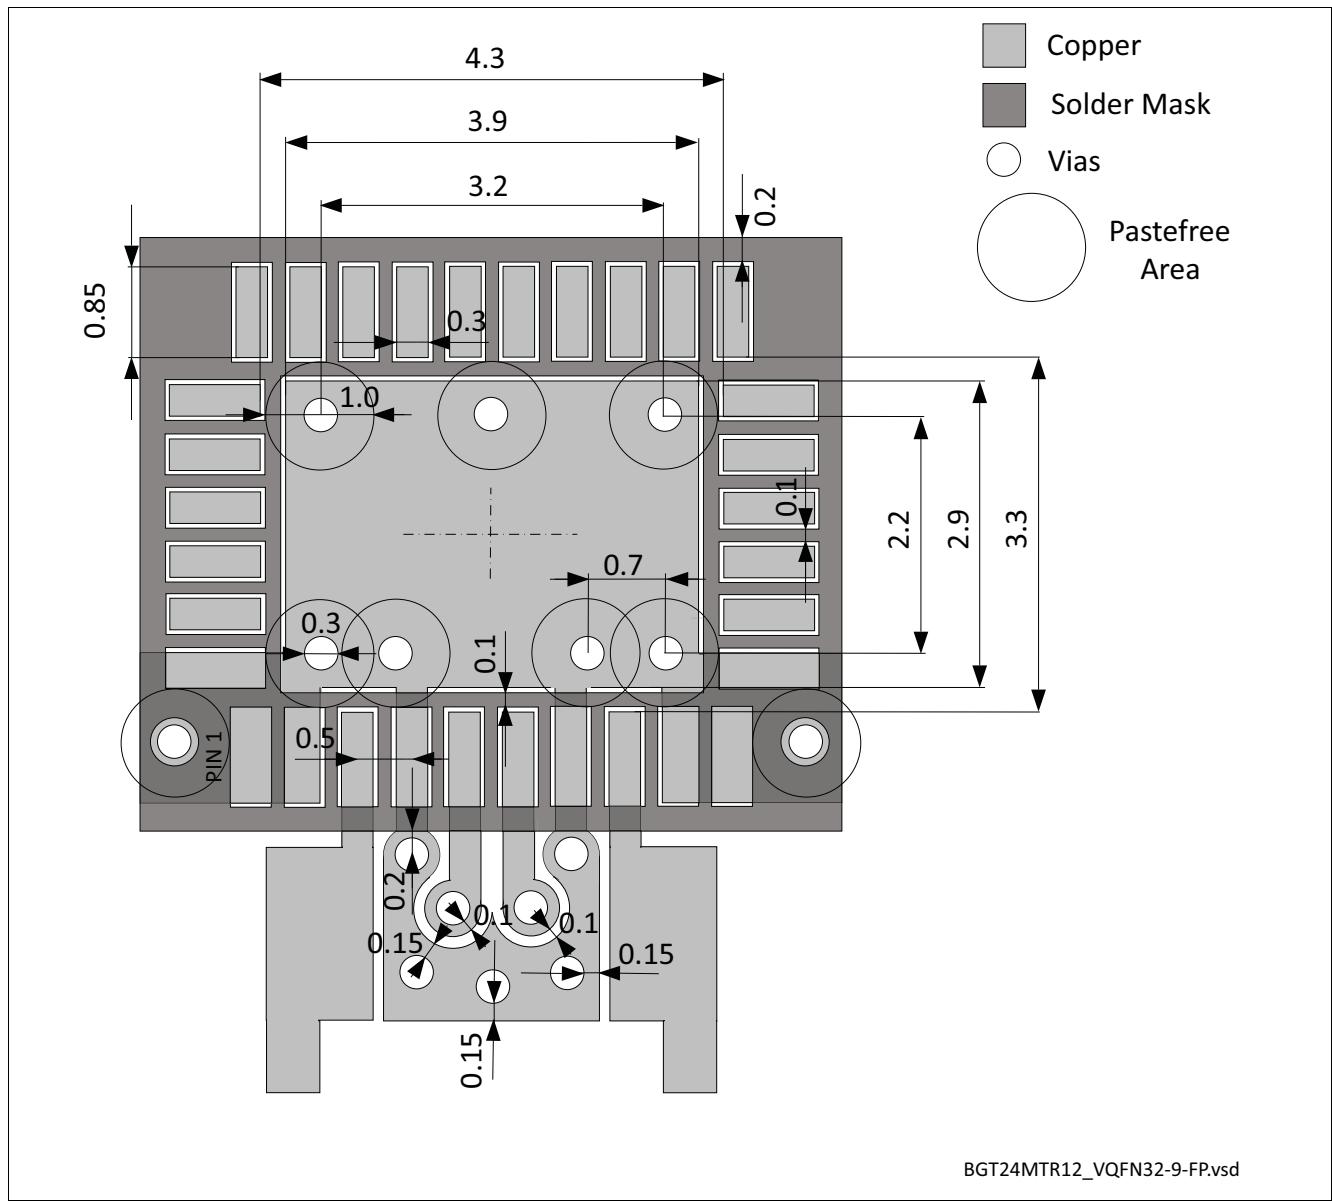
Recommended Footprint and Stencil Layout for the VQFN32-9 Package
